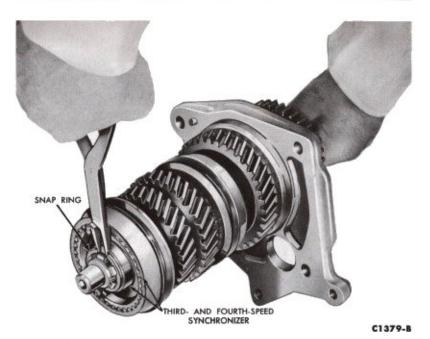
Third and Fourth-Speed Synchronizer Removal
